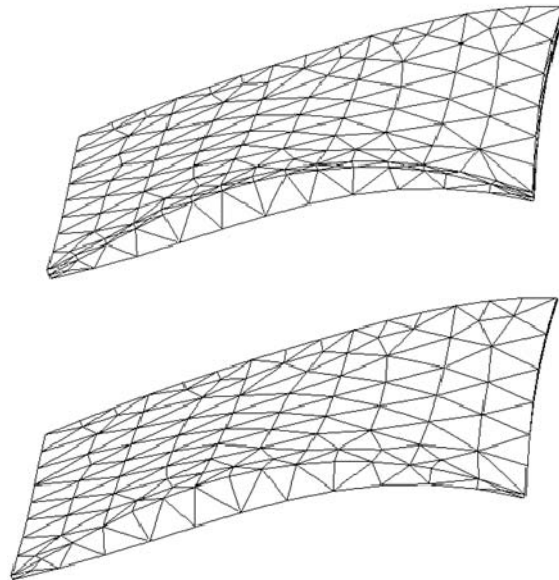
Mesh model of unmachined (left) and machined (right) workpiece
